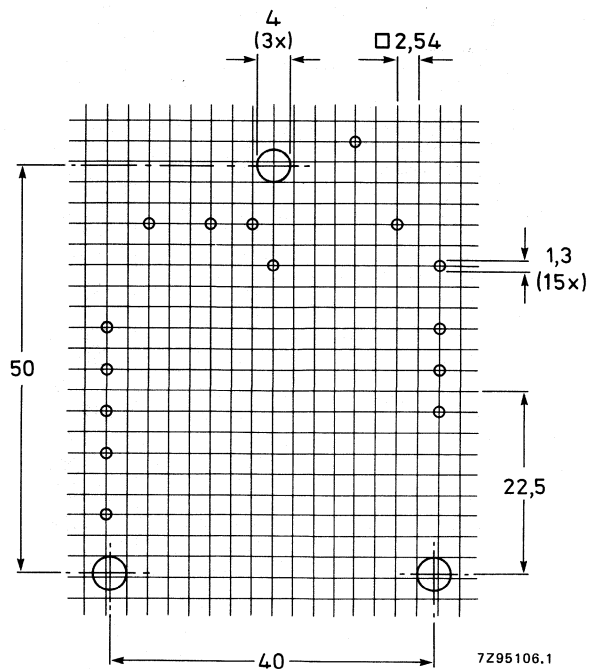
Hole pattern for mounting on a printed-wiring board (solder side).
